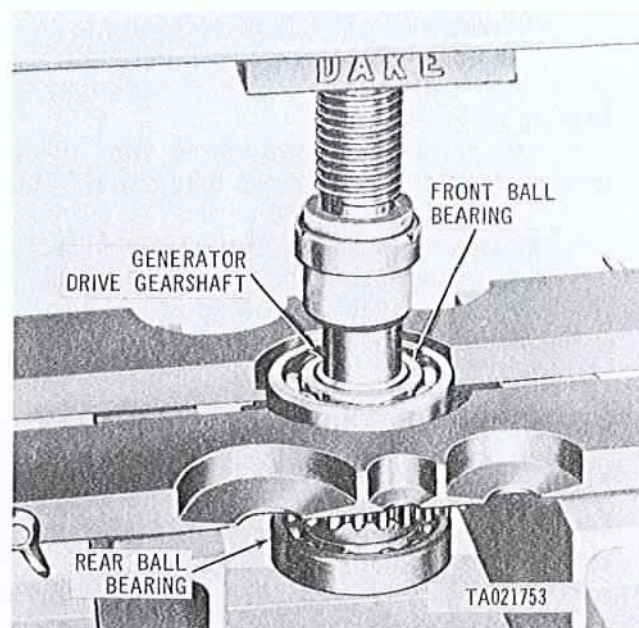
Pressing generator drive gearshaft from ball bearing, model AVDS-1790-2D and AVDS-1790-2DR engines.
